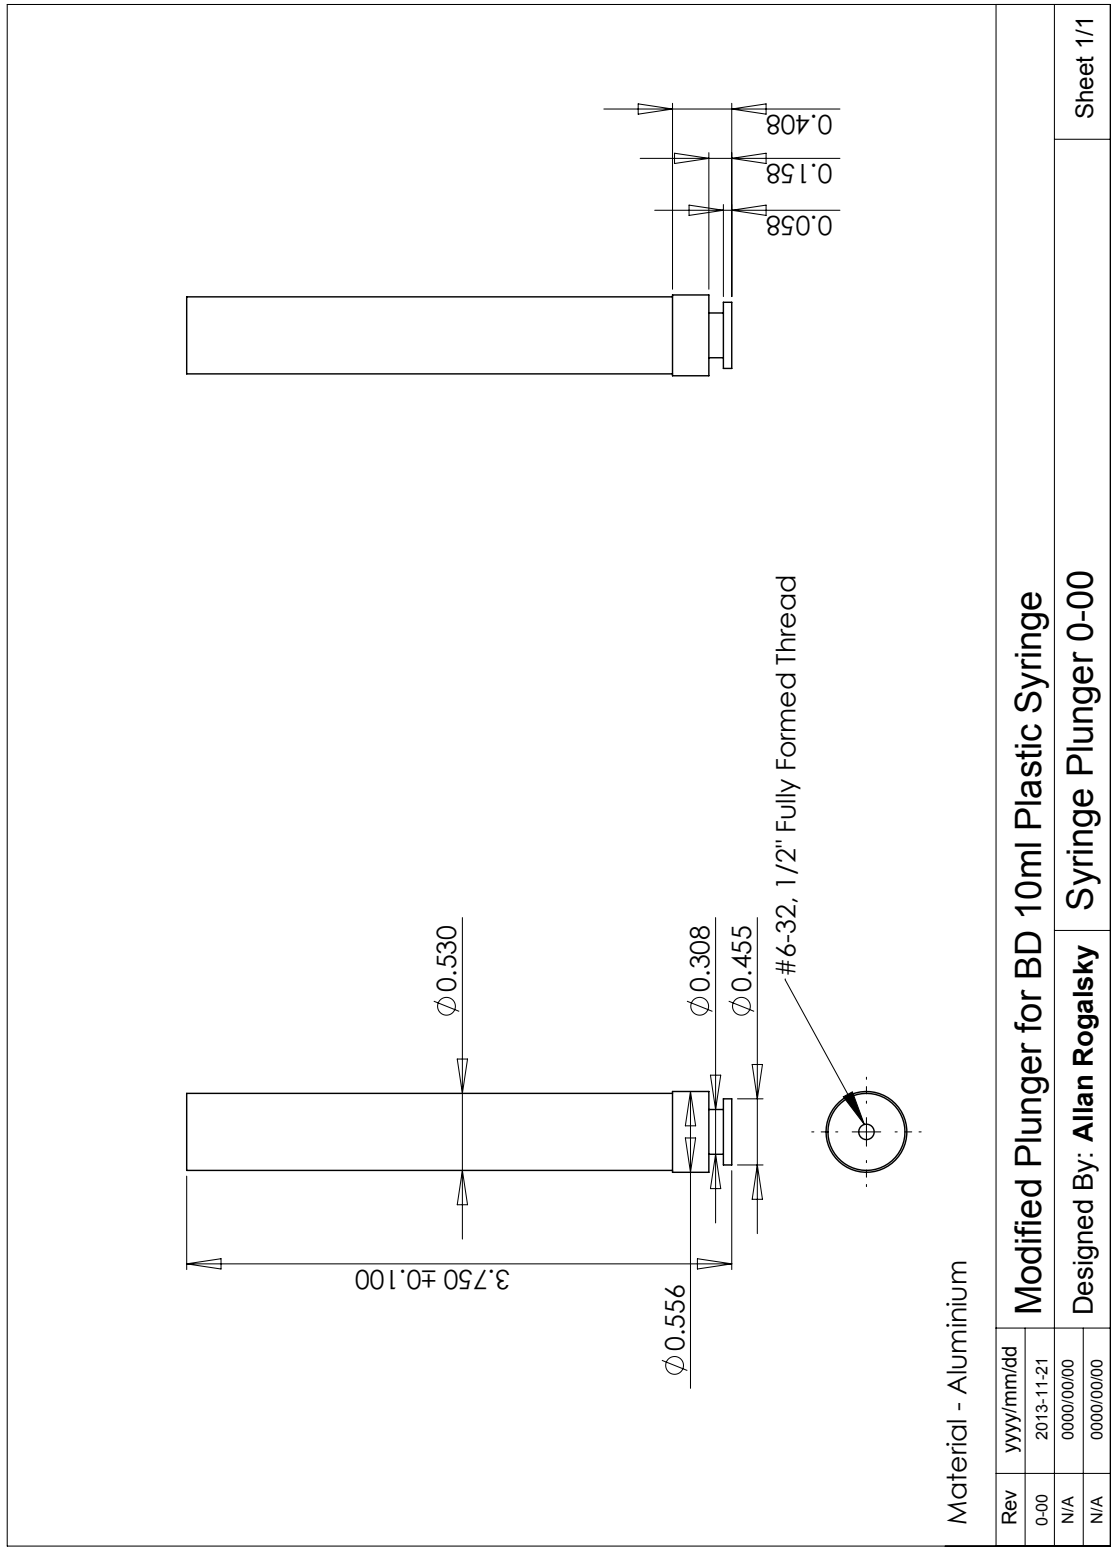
Capillary Rheometer / Driven Syringe Assembly / Syringe Plunger
